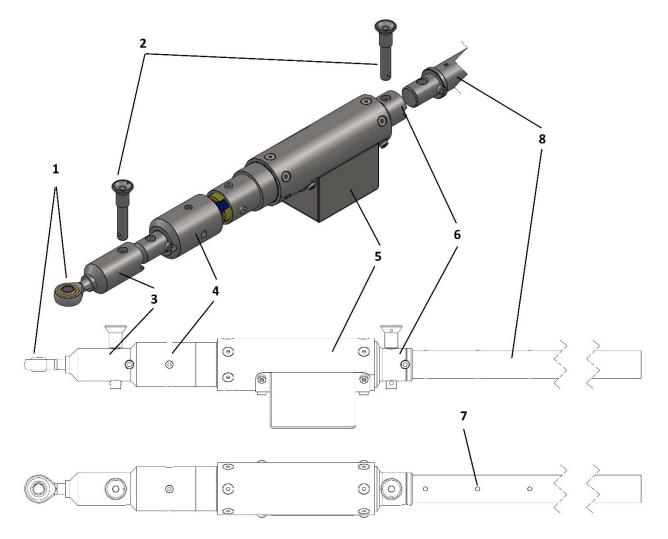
divisible diagonal wheel hub rod with fast-decoupling
